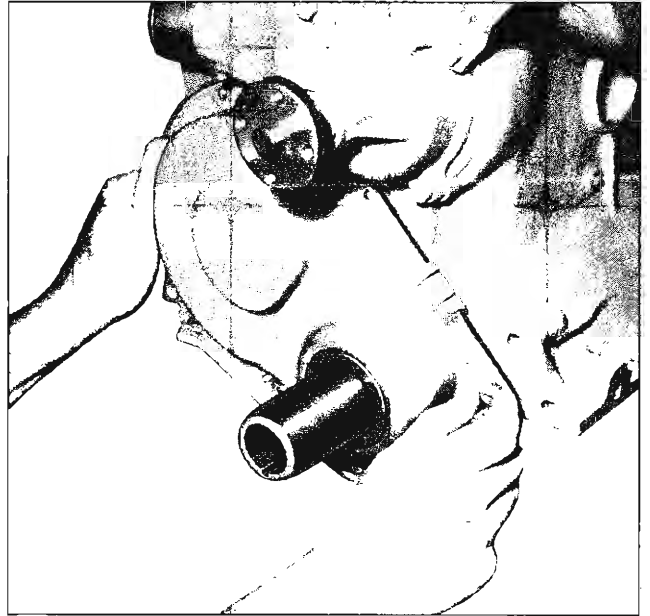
L—Crankcase Front Cover Alignment with J-0966
